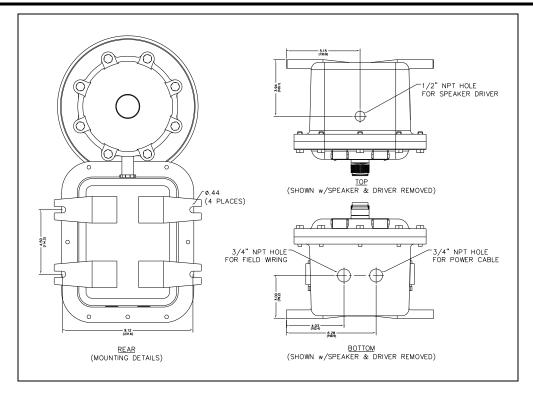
Model 400-001/400-002NS Mounting Details and Conduit Entries
